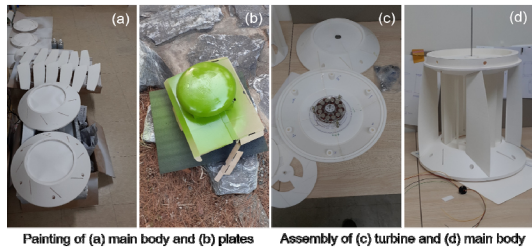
Manufacturing process of dual small wind generator using printing and assembly.
